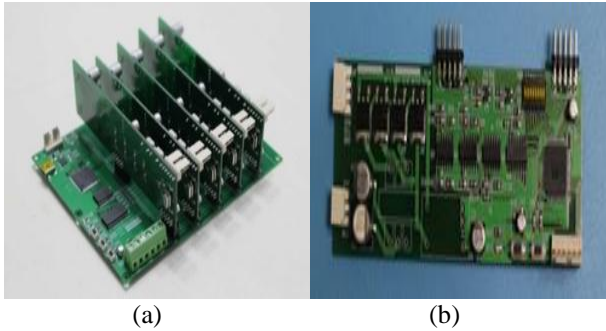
PCB of one MMCU and SMCU with five channels: (a) MCU and SMCU board, (b) SMCU board.
